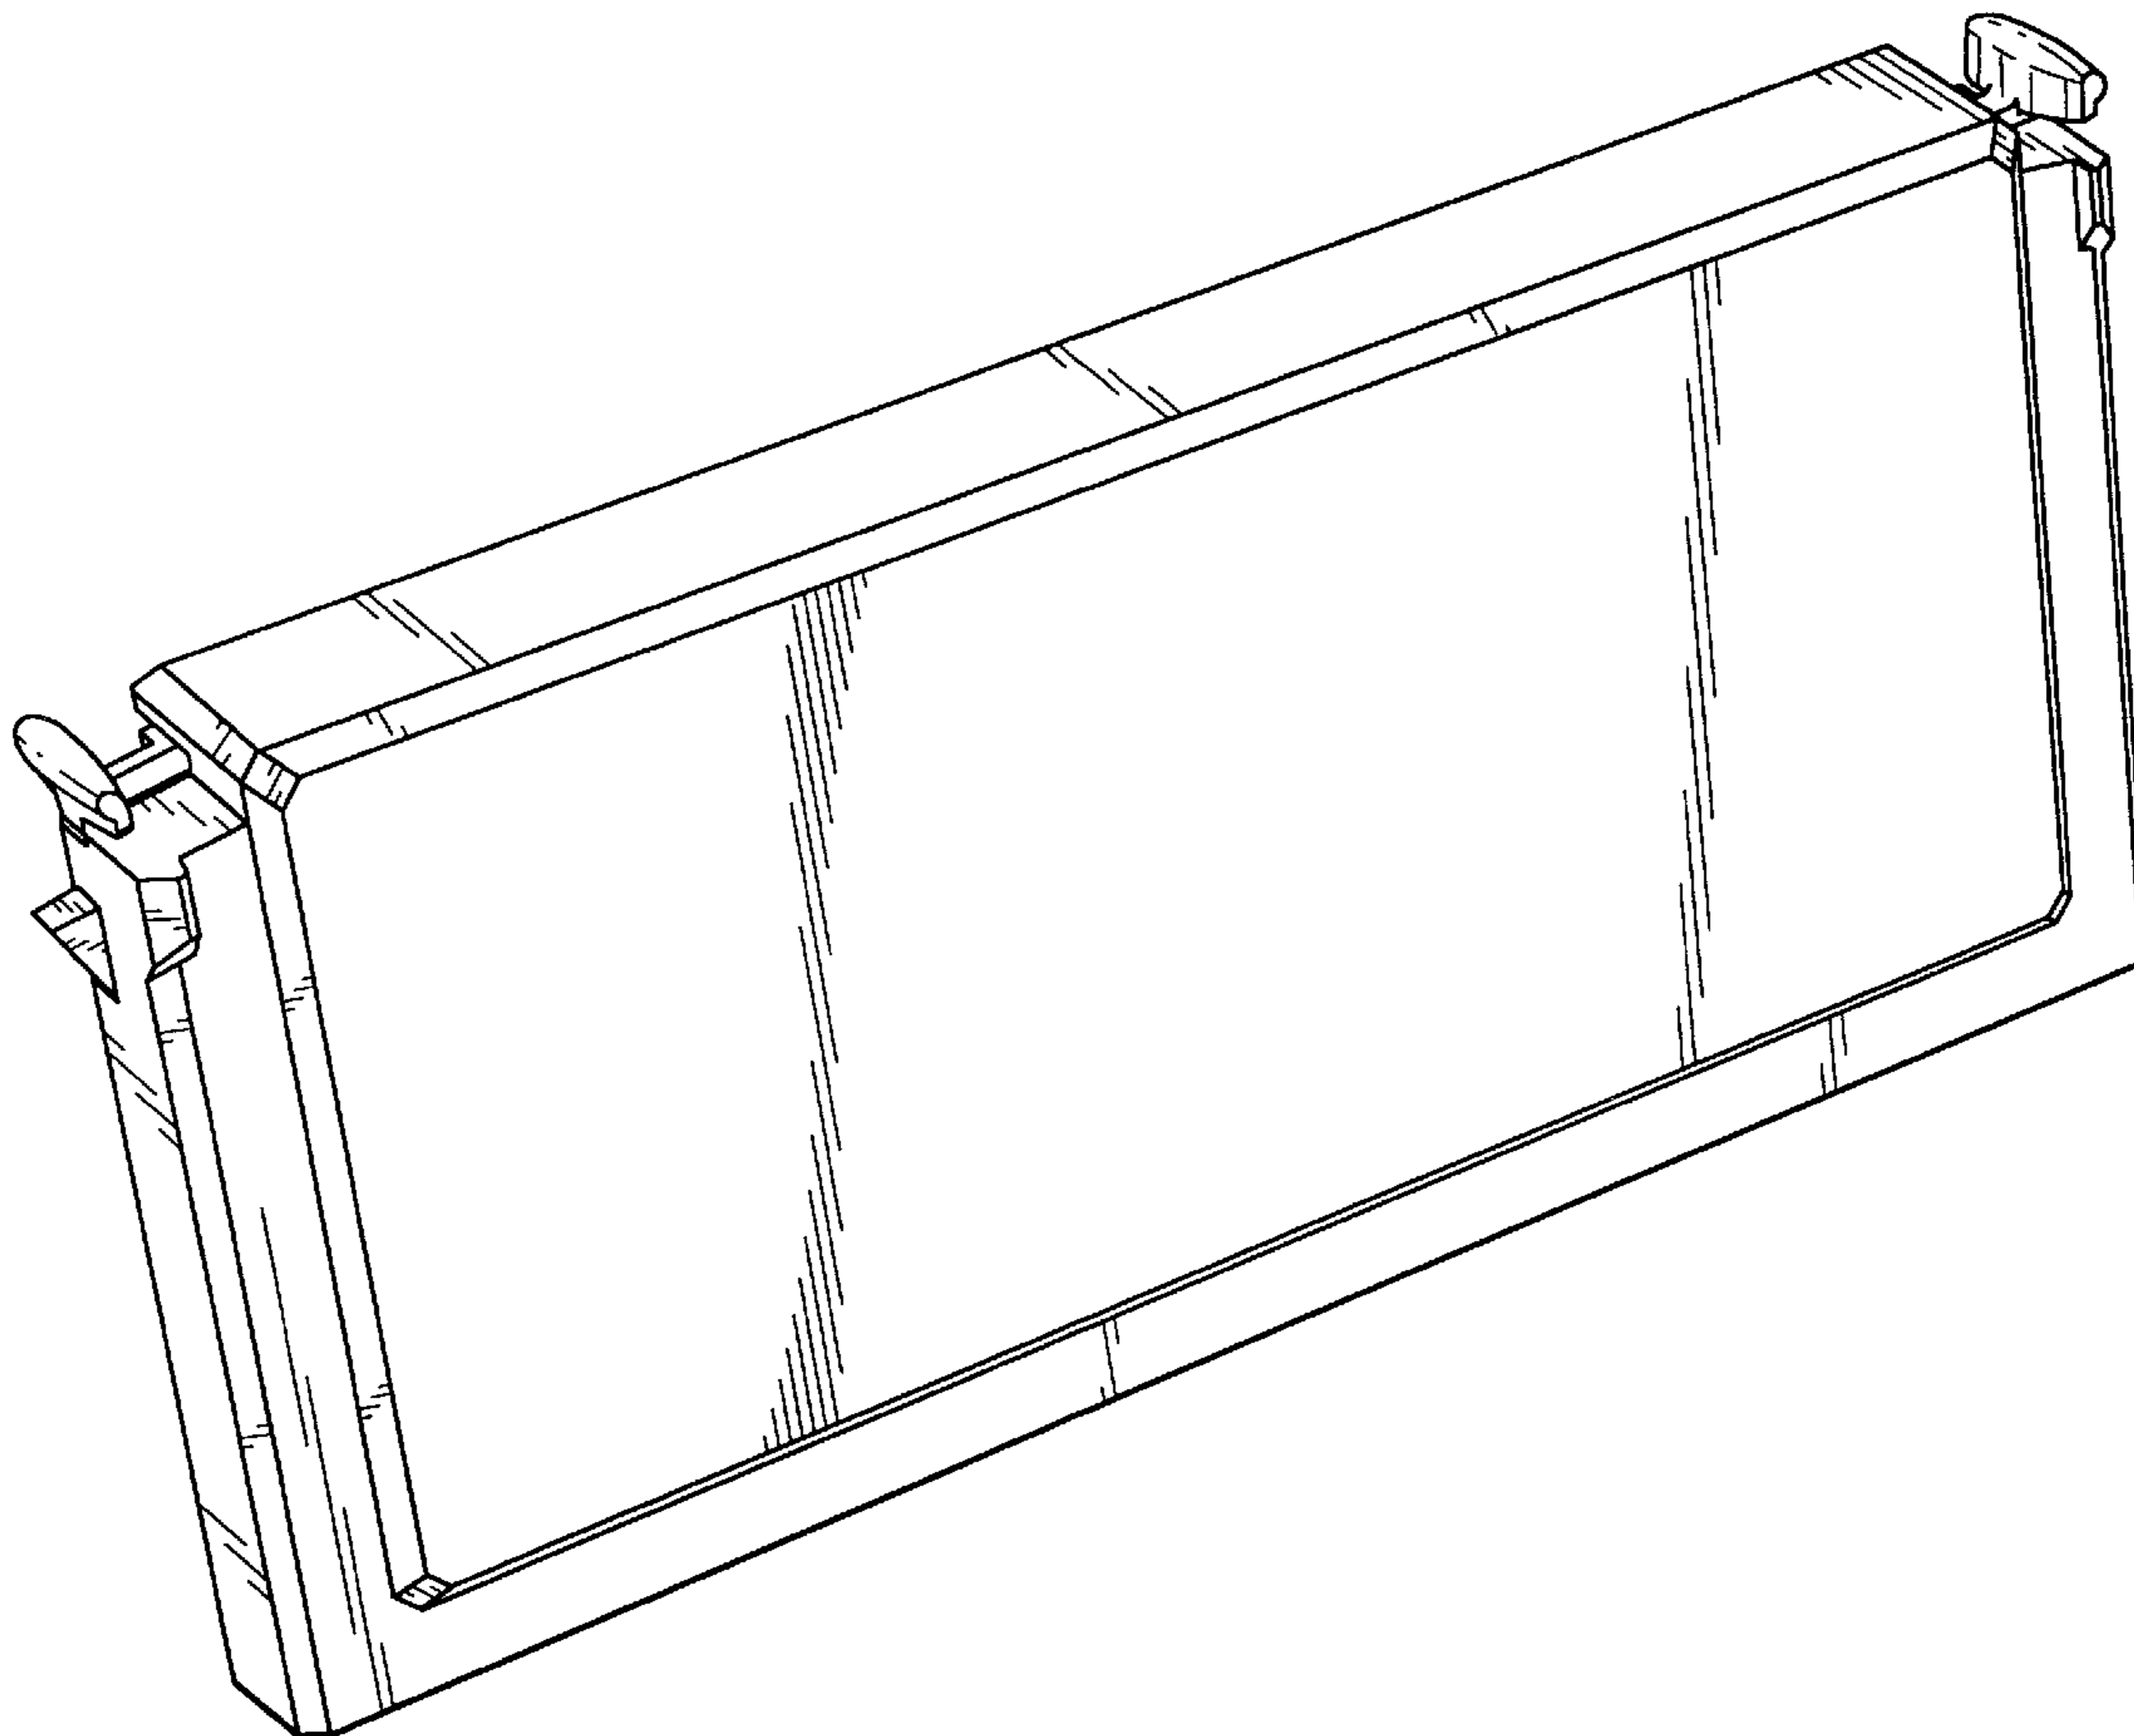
is a perspective view of a processor card assembly; FIGS. 2-3 are the front and left side views respectively thereof; and, FIG. 4-7 are the back, right side, top, and bottom views respectively thereof.
